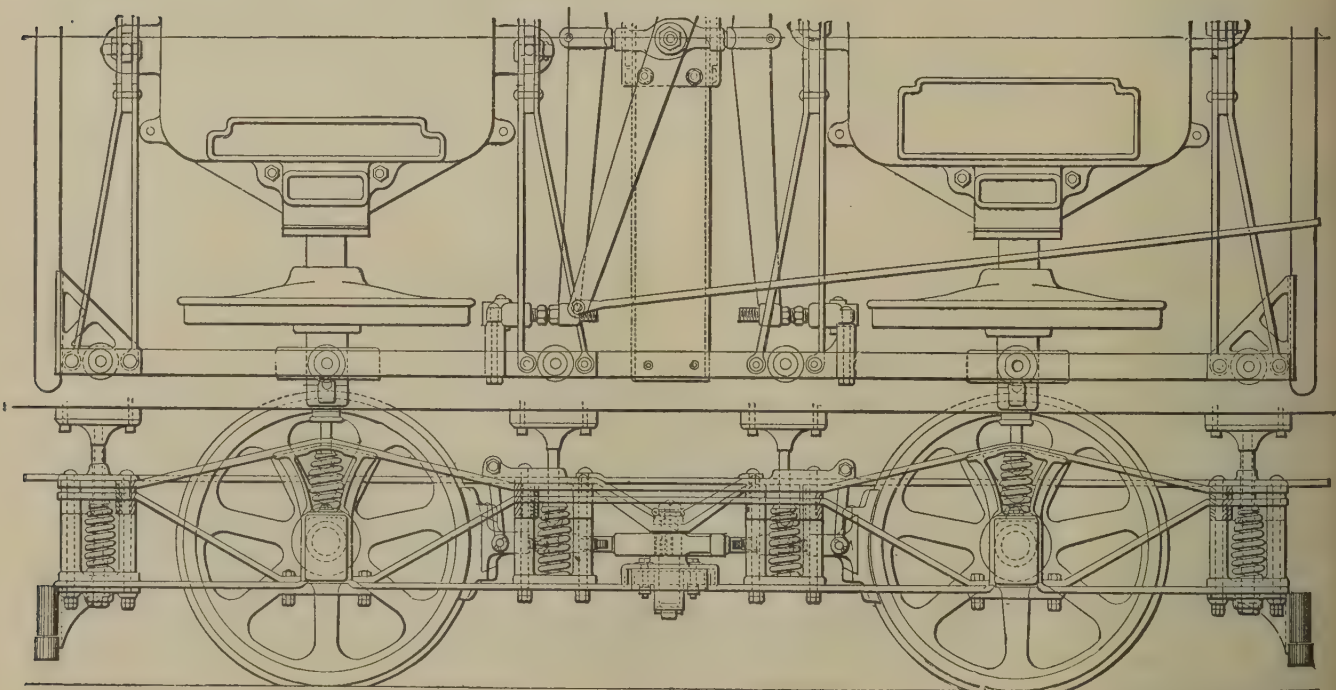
ELECTRIC TRUCK, WESTINGHOUSE MOTORS—BALTIMORE CAR WHEEL CO.
